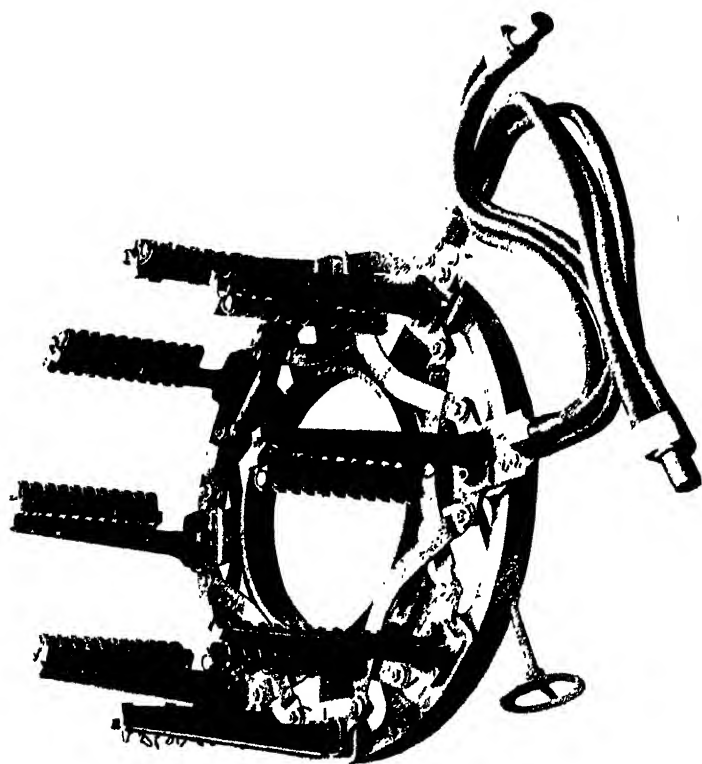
BRUSH GEAR OF D.C. GENERATOR
